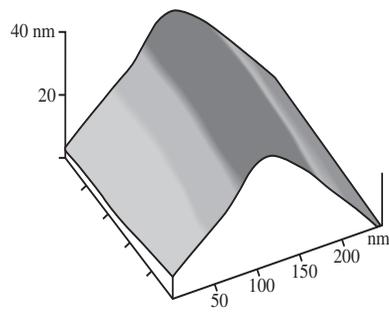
New single crystalline diamond tool with a 10 nm edge radius.
